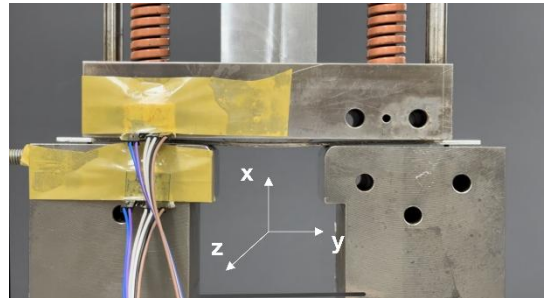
Picture of the 2D draw bending experiments, sensor 1 on the punch and sensor 2 on the blank holder
